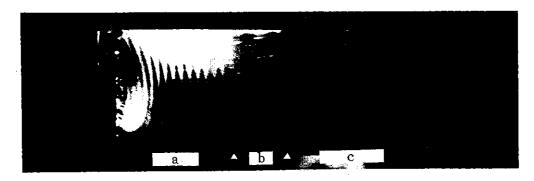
Fracture fractography of the specimen with one-side groove.
